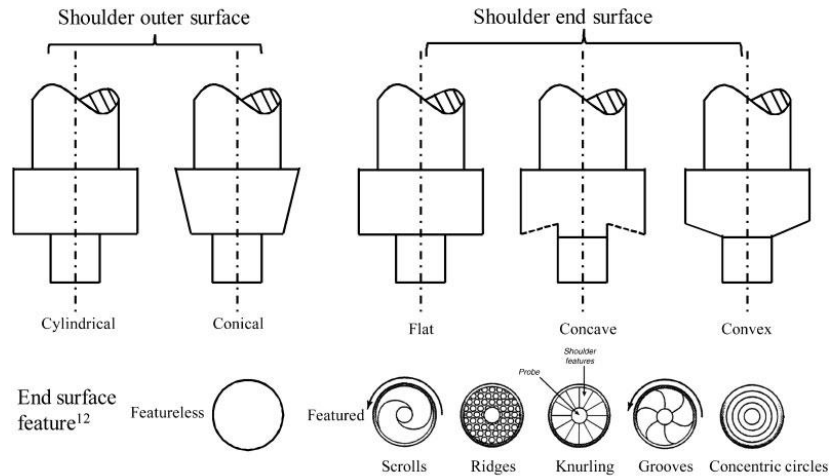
Summarizes the typical shoulder outer surfaces, the bottom end surfaces and the end features [176].
